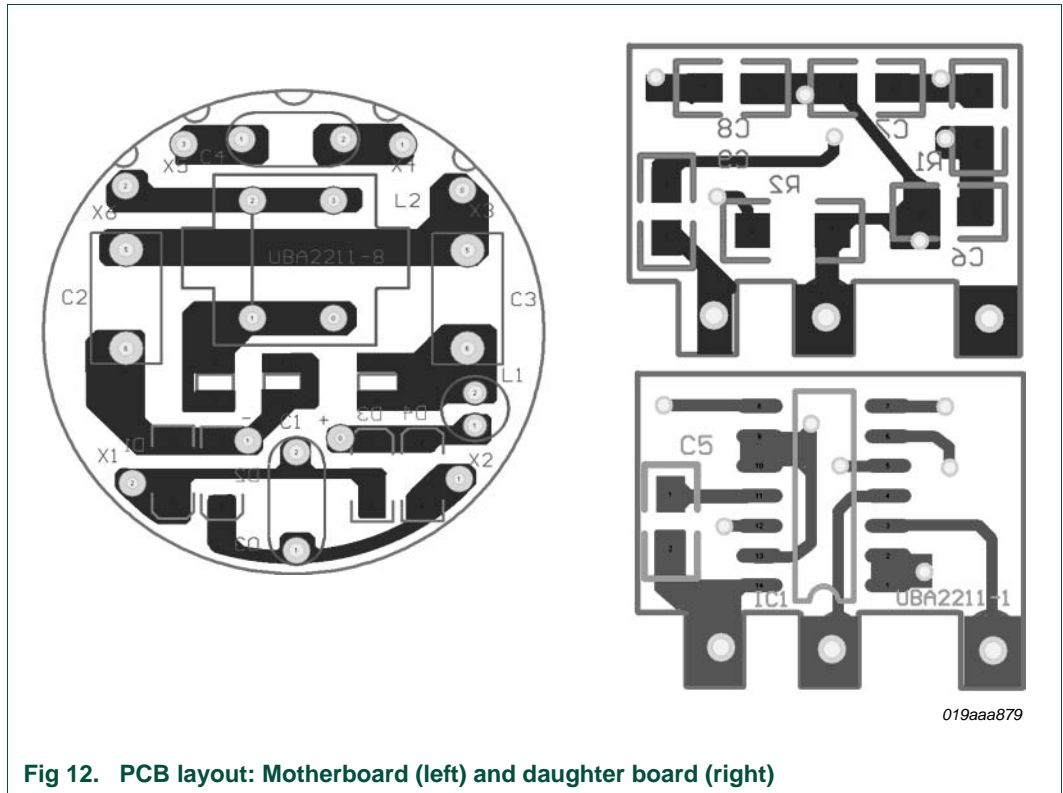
PCB layout: Motherboard (left) and daughter board (right)
